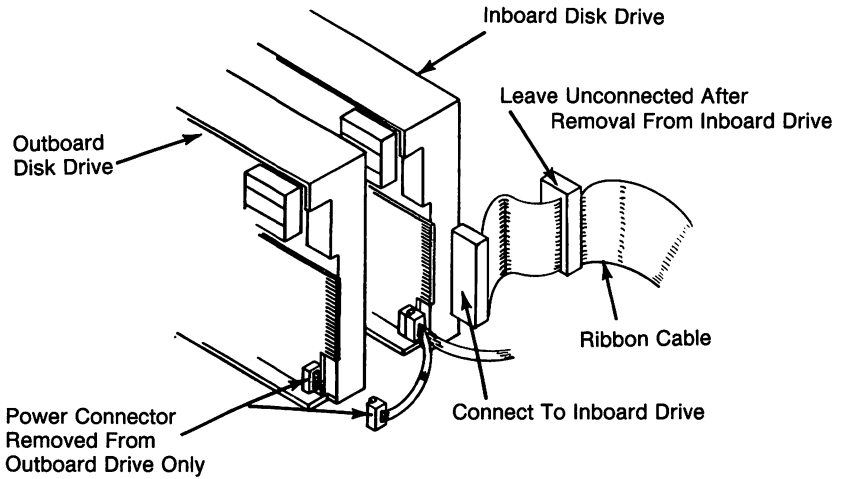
Right, rear quarter view. Changing connection to inboard disk drive
